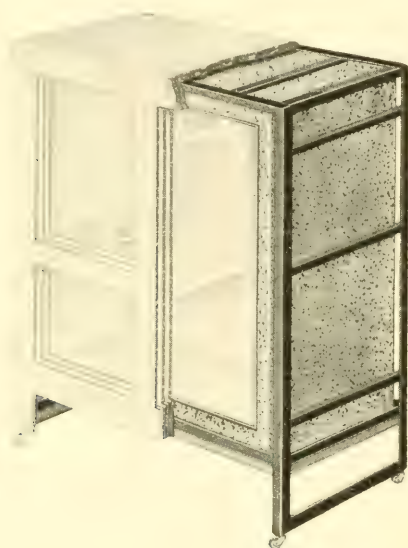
CAVALIER REFRIGERATOR, SHOWING CONSTRUCTION.
